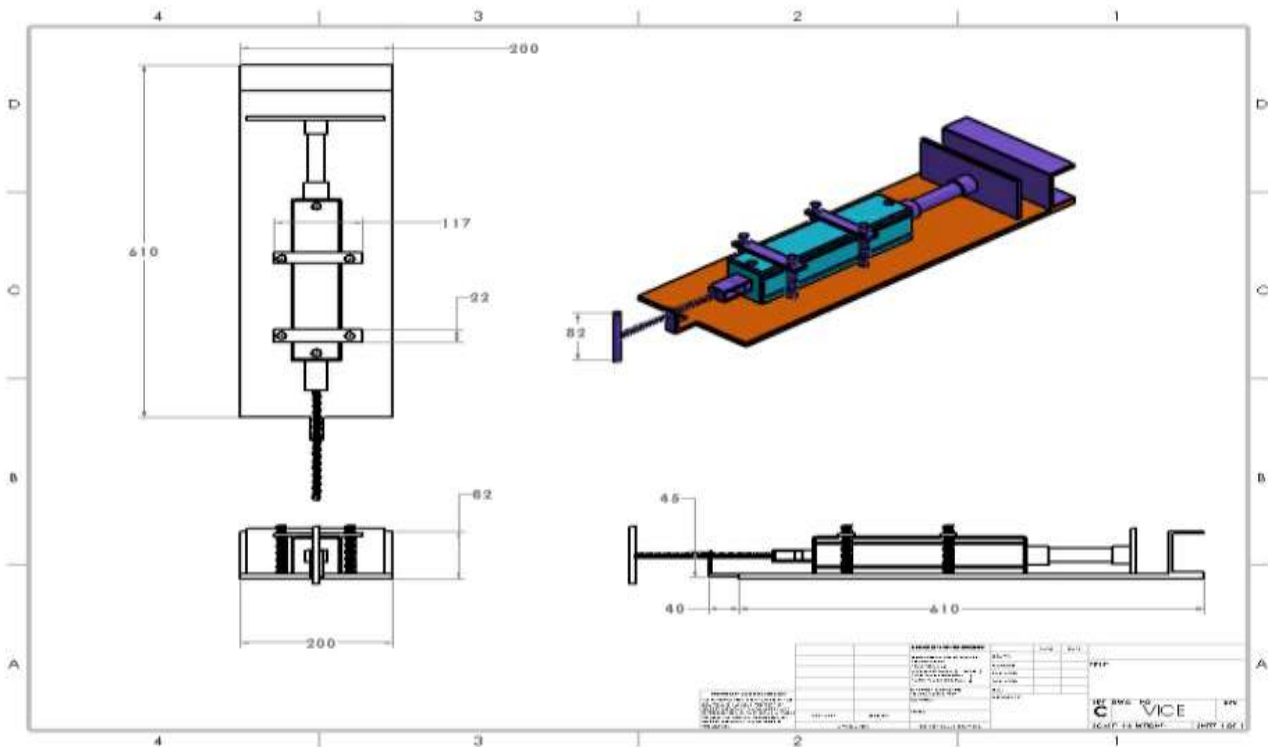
SolidWorks Drawing of the Clamping Mechanism
